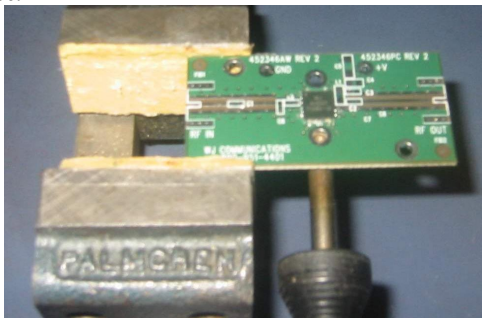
Heat is applied to the bottom of the PCB beneath the device.
